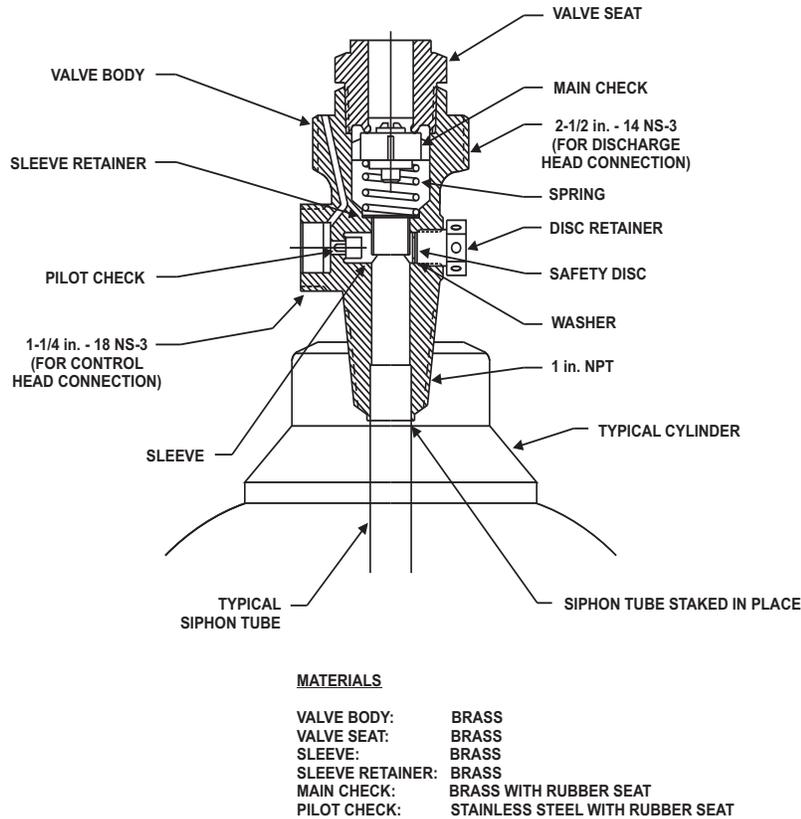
5/8-inch Type "I" Cylinder Valve
